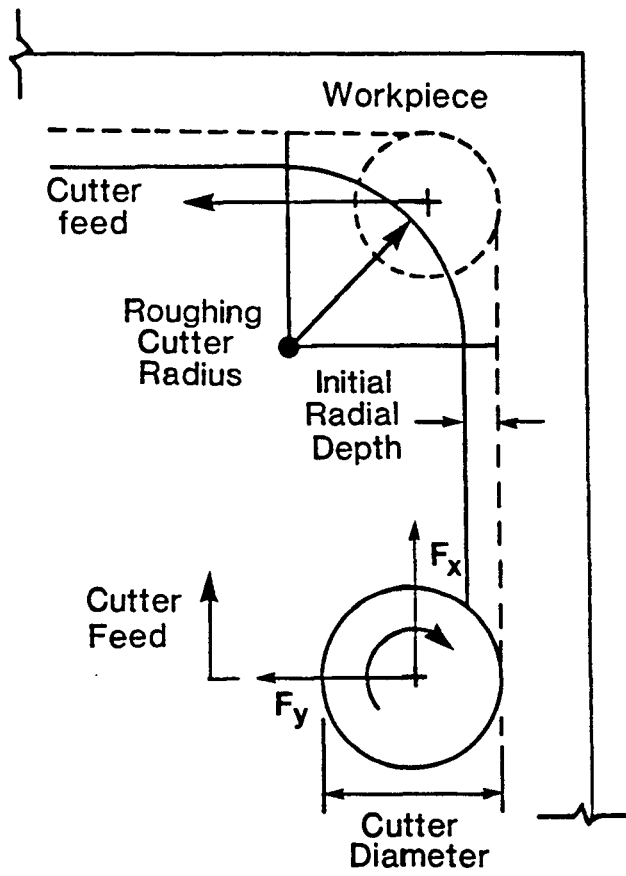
CORNERING CUTS IN END MILLING (REF. 4)
